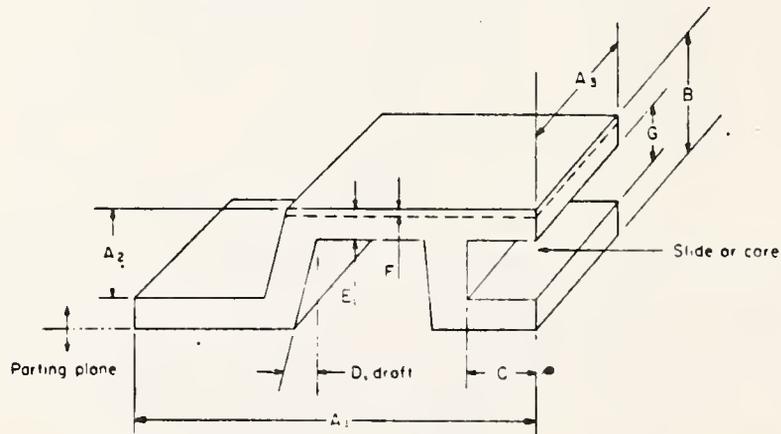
Suggested Dimensional Tolerances for Die Castings
